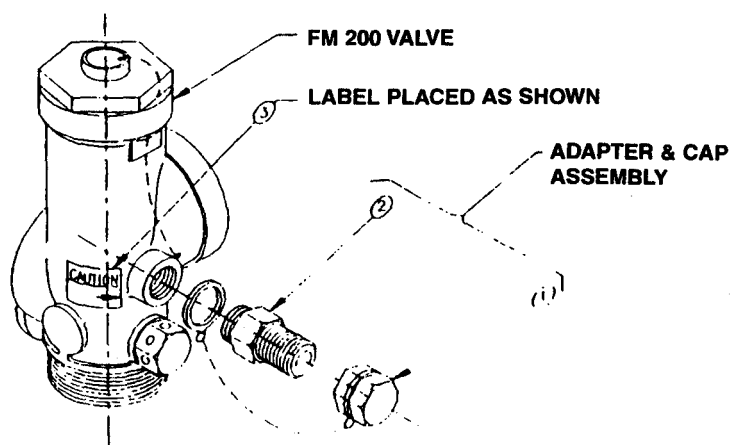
Installation of Master Cylinder Adapter Kit
